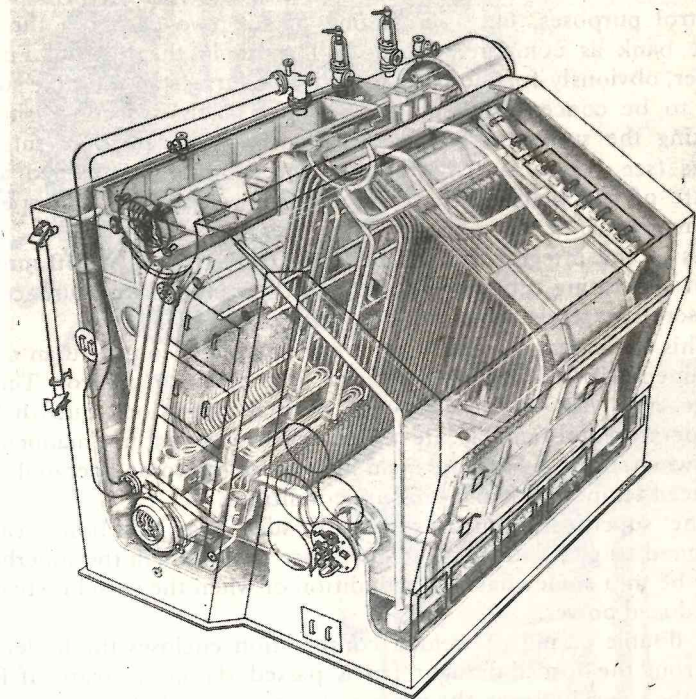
Cut-away view of Babcock marine boiler, selectable superheat type. Showing a single furnace and two sets of dampers for adjusting the gas flow through the superheated and saturated sections of the boiler.
